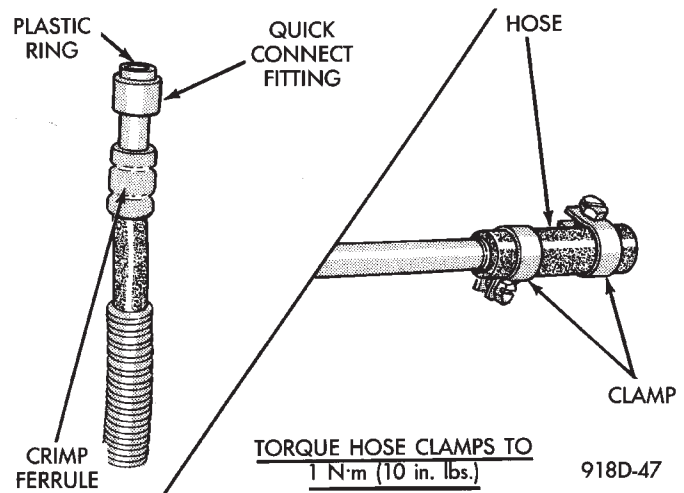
Quick Connect Fuel Fittings to Fuel Rail
